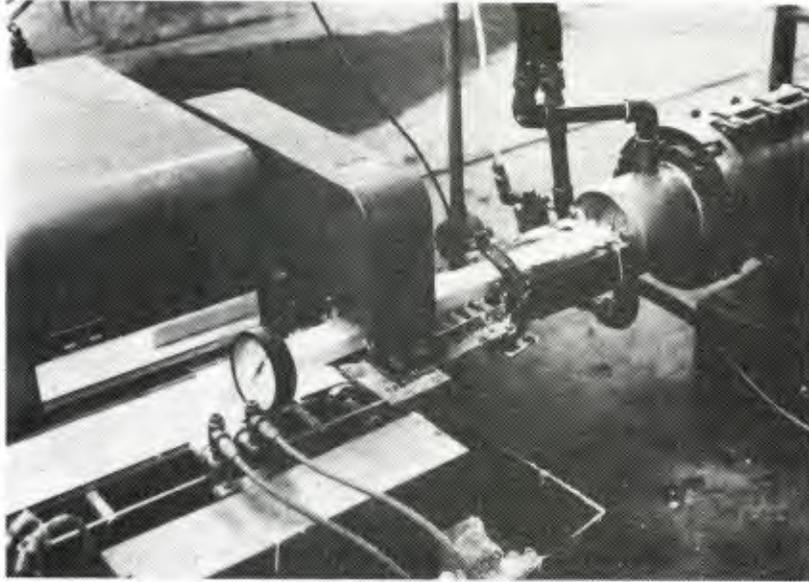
Extruded Composition C-4 Exiting the Die Head
